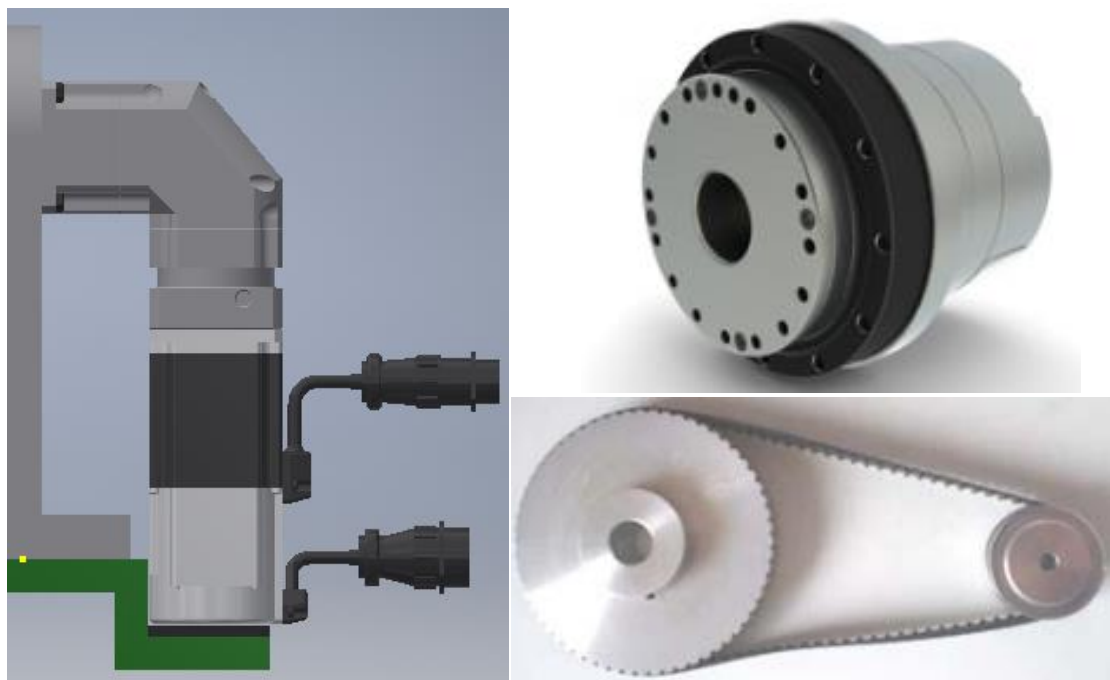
Options for dynamic control of cradle. Right angled gear (left), harmonic drive (top right) belt and pulley (bottom right).
